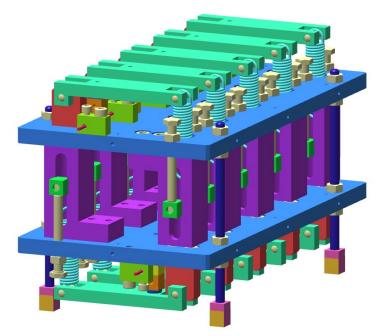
Cold welding test stand for accelerated tests of potential cold welding of a number (10x) samples with higher contact pressure. Currently being manufactured, tests are to be performed during spring 2022. Actual tests were finished successfully (no cold welding with newly selected coatings) by the end of 2022.
